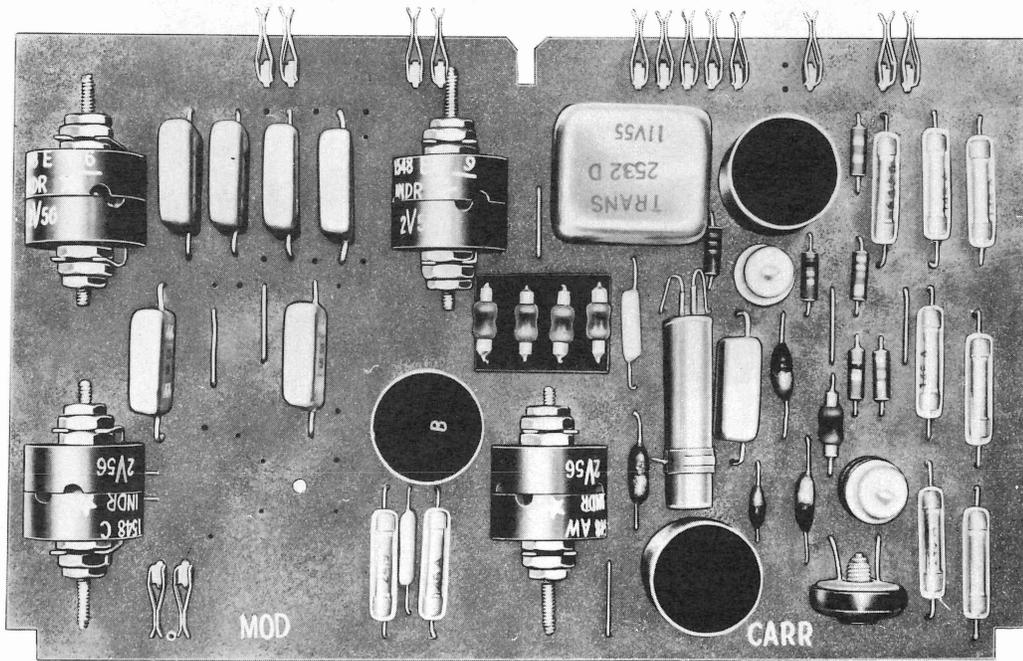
Top of "Printed Wiring" Board Showing Components
